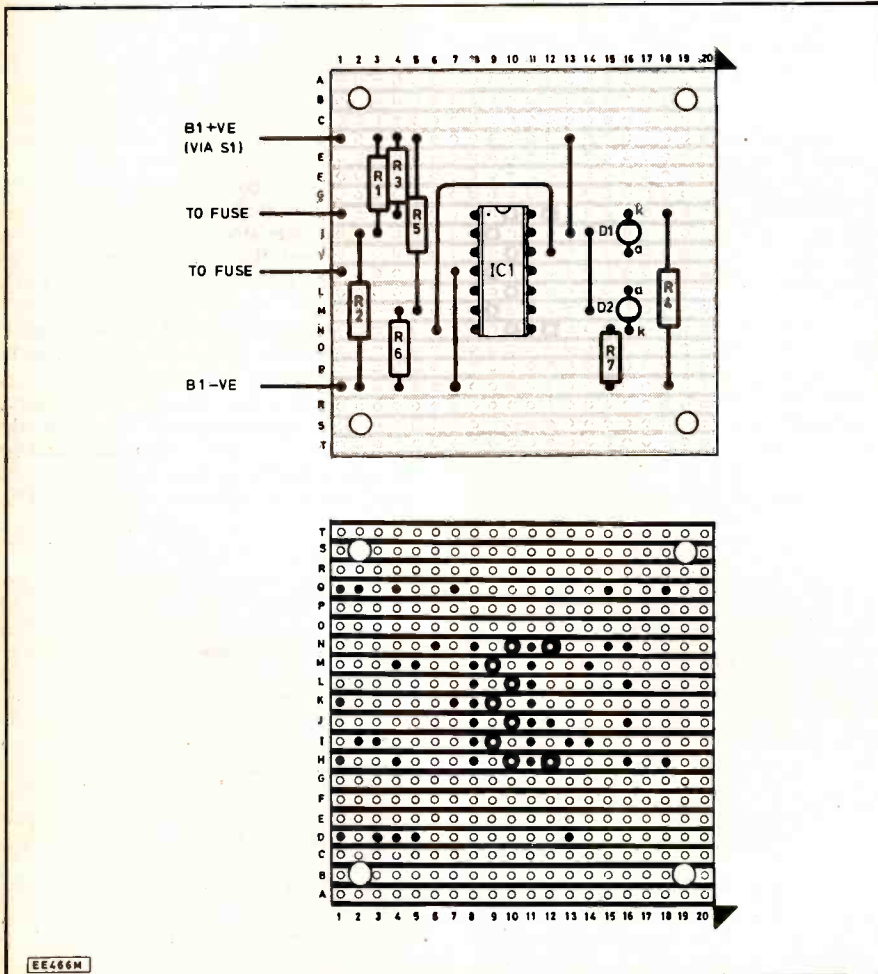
Stripboard component layout and details of breaks required in the underside copper tracks.
